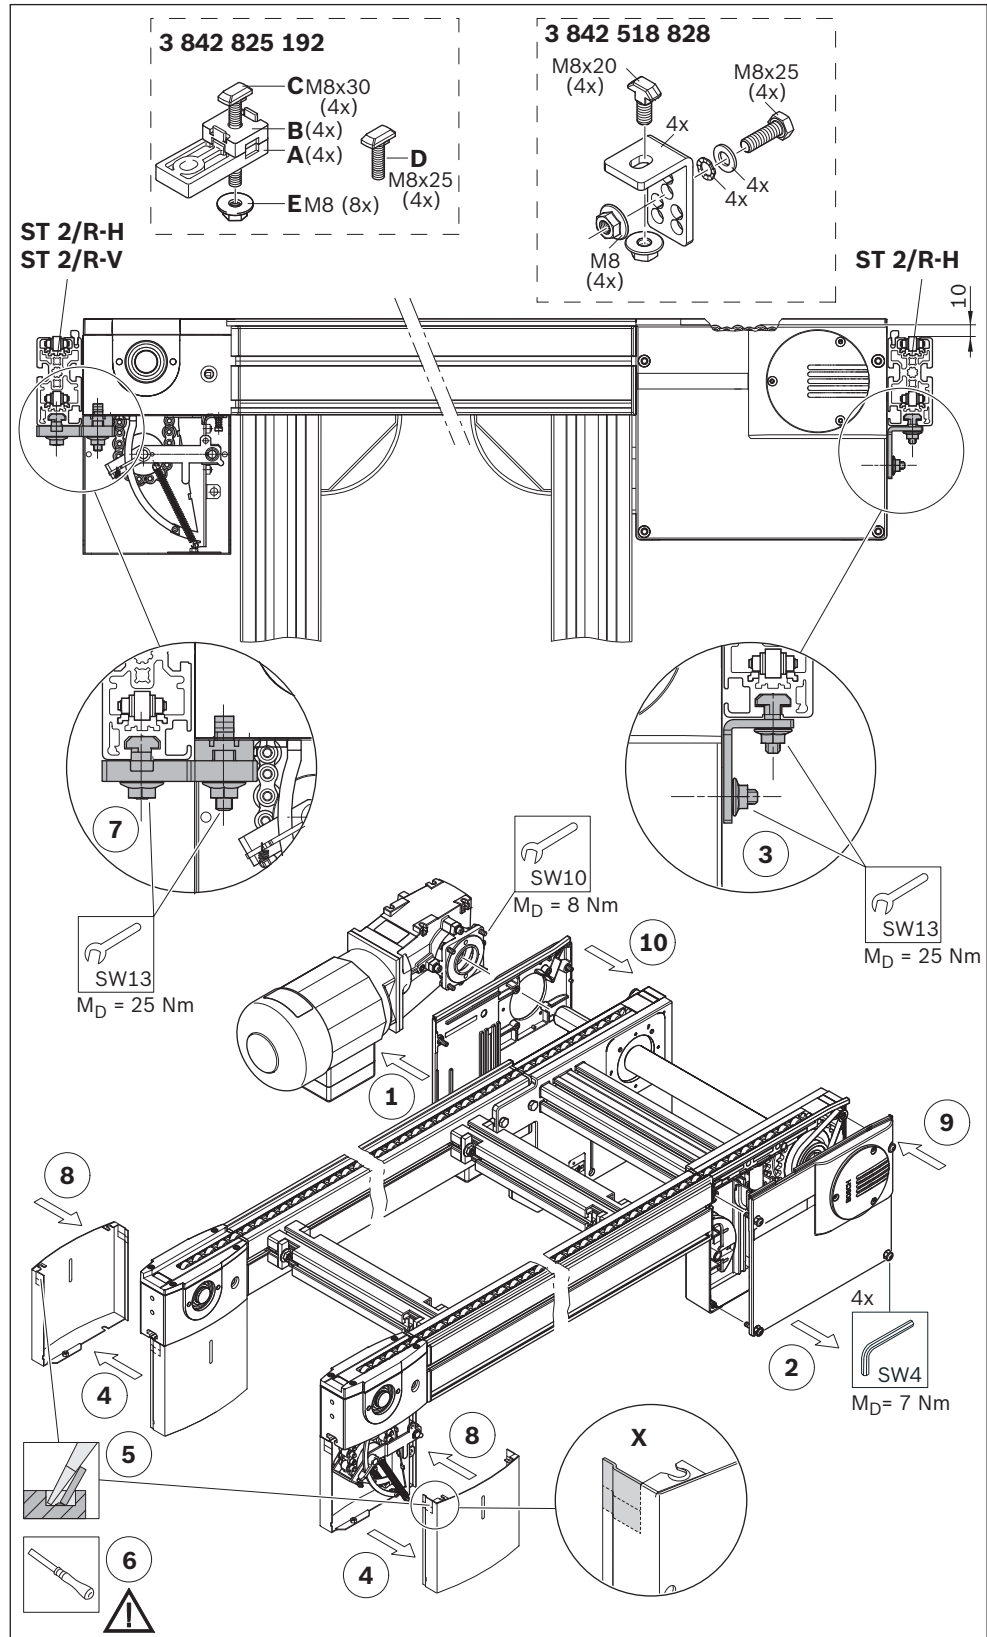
BS 2/R-H, reversible: Assembling the belt section between two sections
